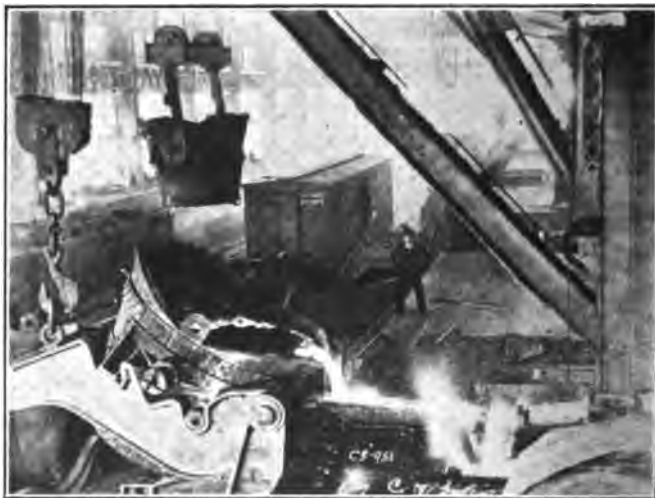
Hot-metal ladle in pouring chain, pouring into branching trough which fills molds.
